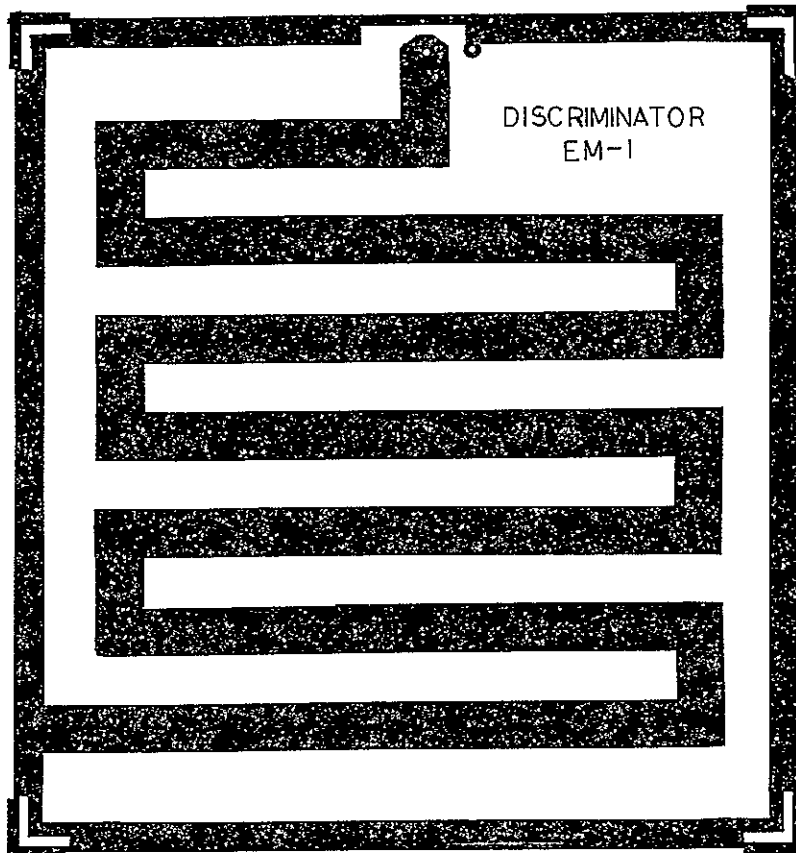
DISCRIMINATOR BOARD LAYOUT.
